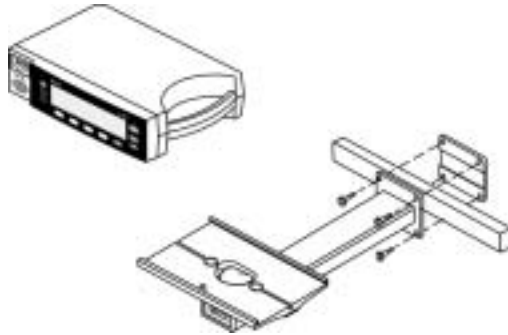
GCX Poly-mount (horizontal wall mount with rail adapter)
